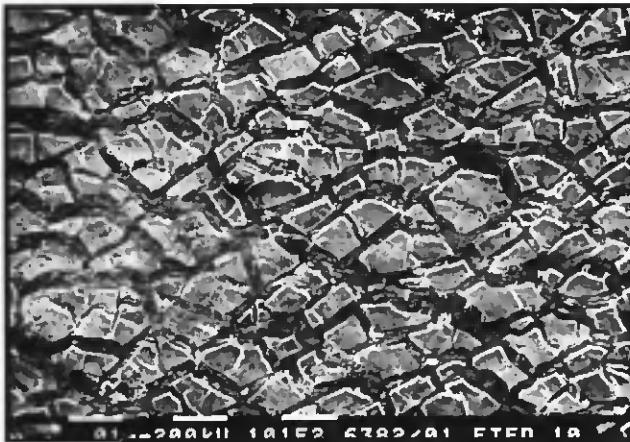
Weld interface surface after fracture, steel-steel with one-sided heat-treated electroless Ni plating (FTFD),  $Y = 0.610$ .
